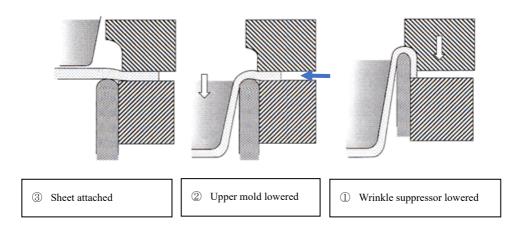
shows the cross-section of the molding die. The upper mold (male) is provided with a ring-shaped slidable clamp (b) on the outside of the core (a). The inner circumference of the wrinkle holder has a rounded end and engraved to make the cross section U-shaped. The lower mold (female) does not have a product shape. The ends are rounded. Outer periphery of the cavity has a vertically sliding ring-shaped wrinkle suppresser. The wrinkle suppressor is supported by the coil spring and is located near the cavity end when the mold is open.
